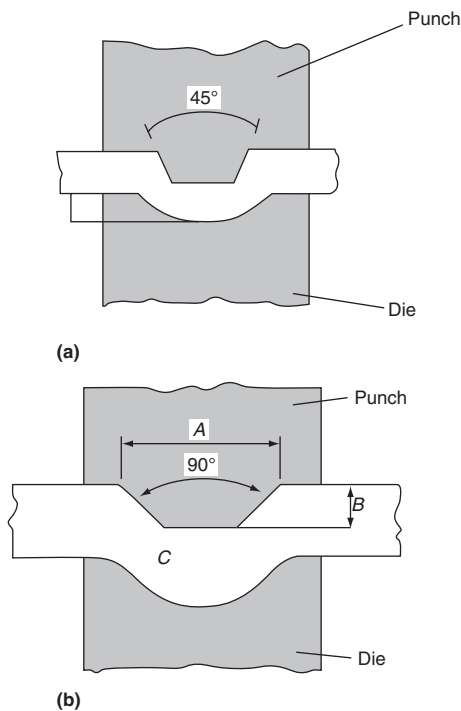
Examples of coined embossed-projection designs. Source: American Welding Society and International Institute of Welding recommended projection designs, circa 1950s
